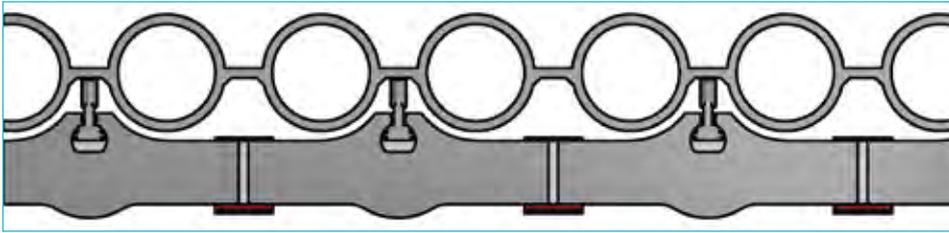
Horizontal cross section through SiC boiler tile system on the membrane wall
